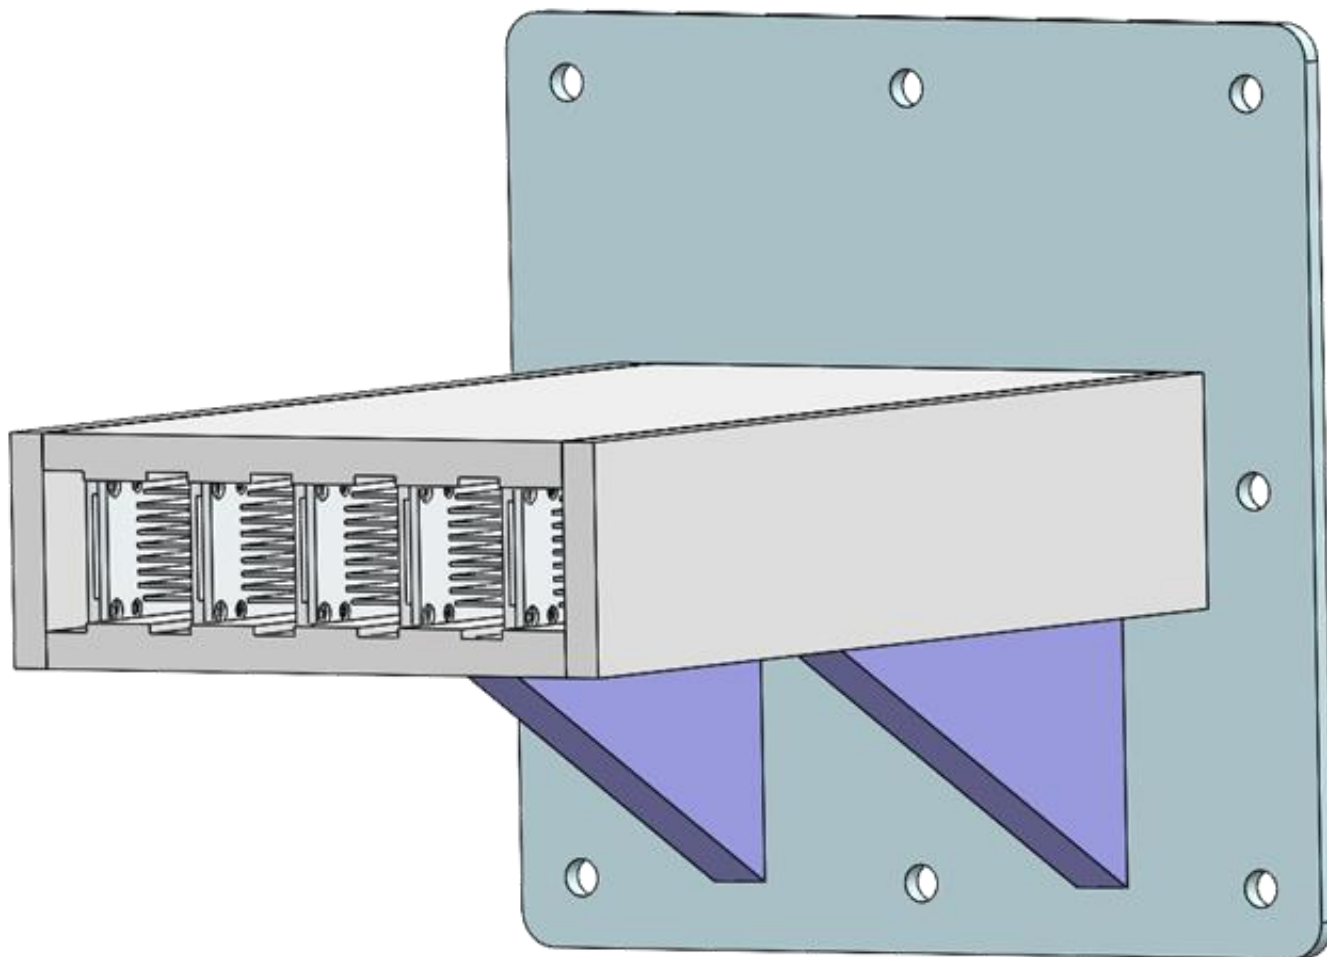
Example E3 2T Test Fixture and Device Setup
